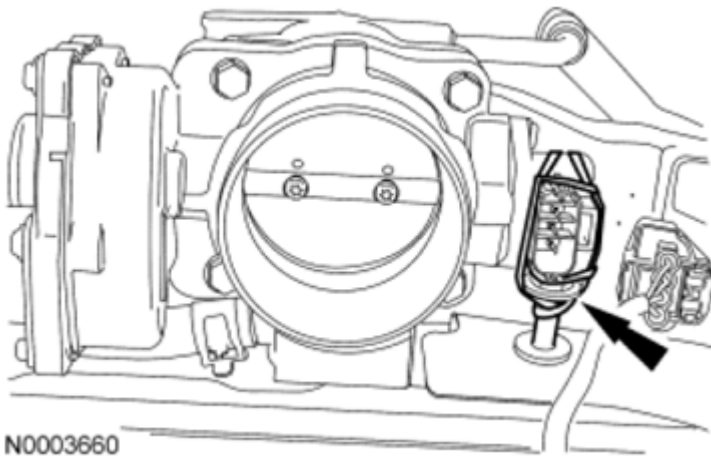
Locating Intake Manifold Crash Bracket With Tie Strap
